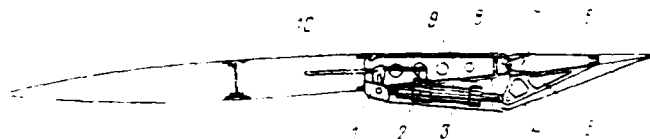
example of installation of hydraulic booster of drive of control surface on thin wing of supersonic aircraft: 1 - mounting bracket of hydraulic booster; 2 - hydraulic booster; 3 - stationary part of fairing; 4 - moving element of fairing; 5 - lever of drive of control; 6 - control; 7 - longeron of control with bracket of charge; 8 - rear longeron/spar (wall) of wing; 9 - supporting rib of wing; 10 - control rod hydraulic booster.
